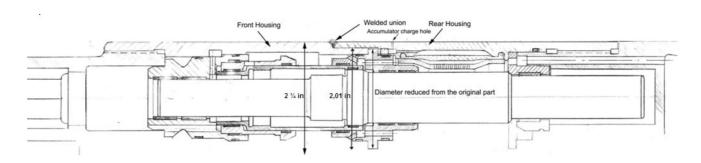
2D drawing of the 2 ½ inches prototype
